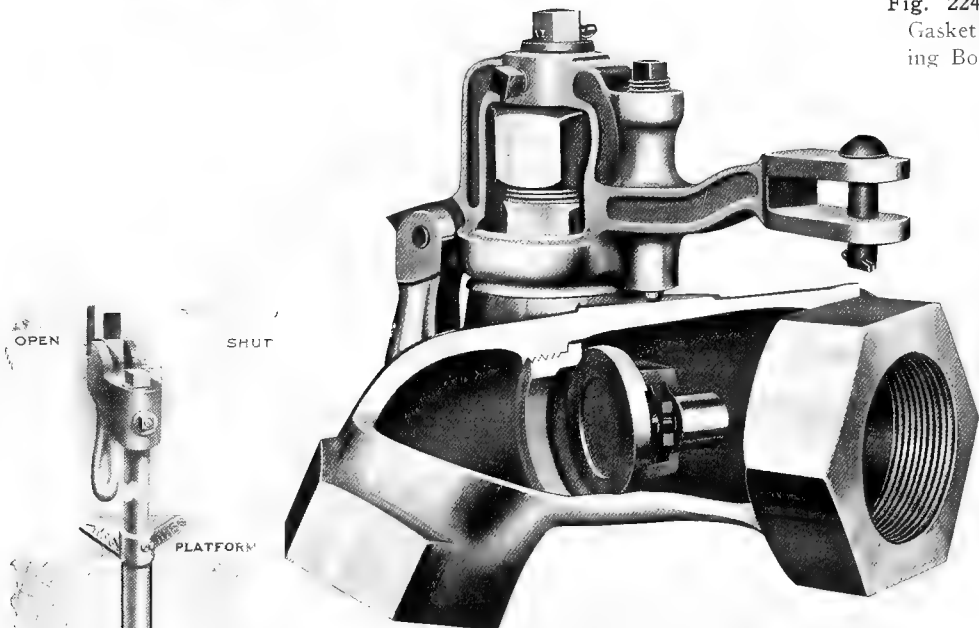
Interior of No. 104 End Train Pipe Valve.
